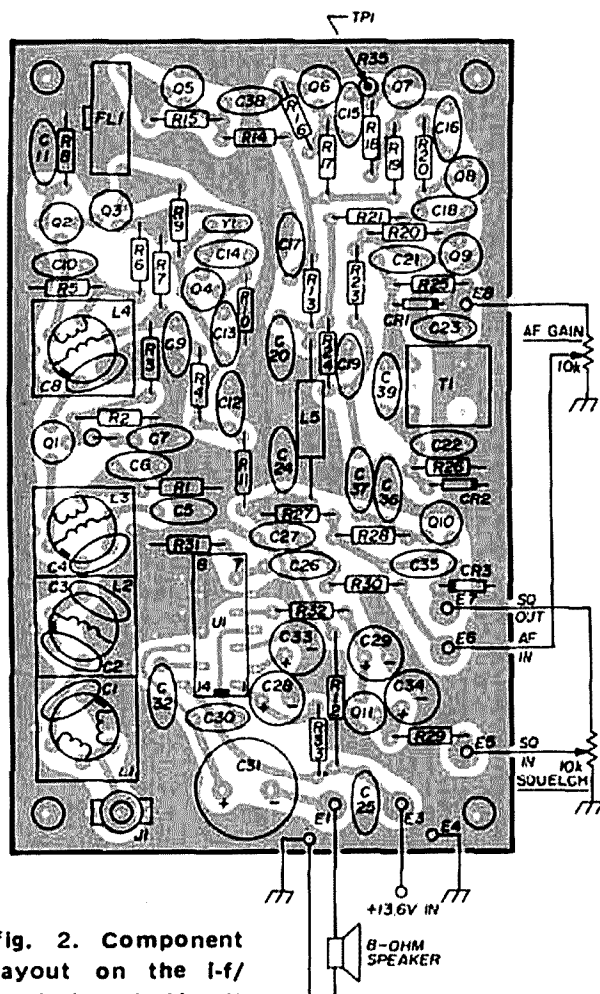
Component layout on the i-f/audio board. Circuit board is 2-3/4" wide (7cm) by 4 1/2" (11.5cm) long.
